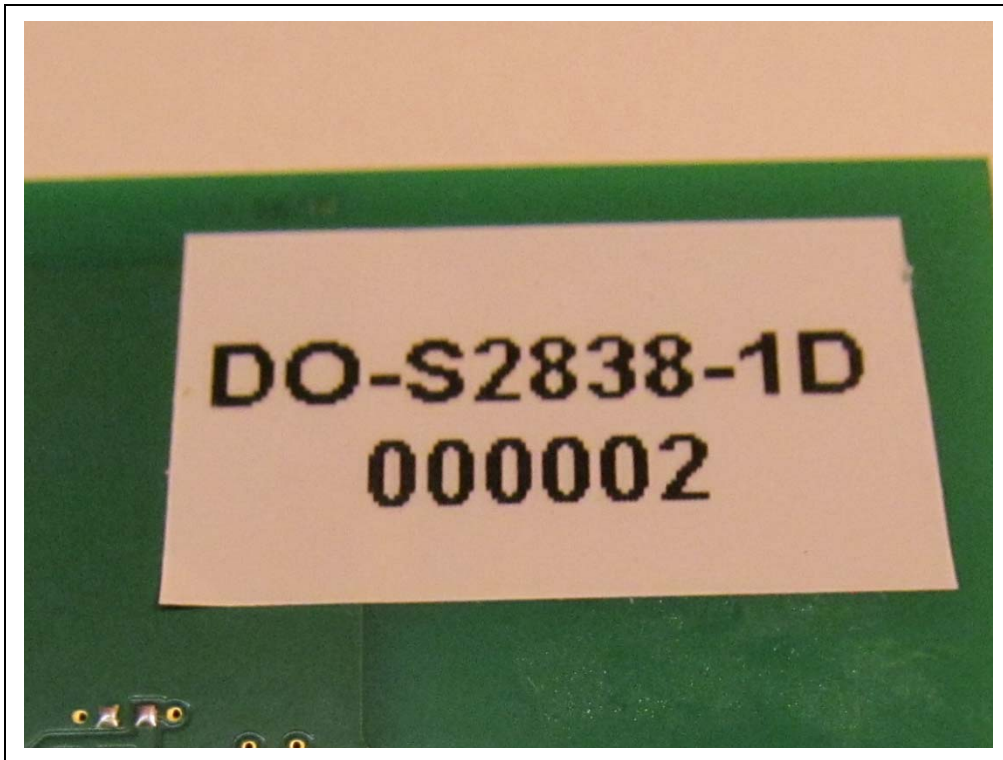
Photo of production sample of D3 Carrier Board Bottom.
